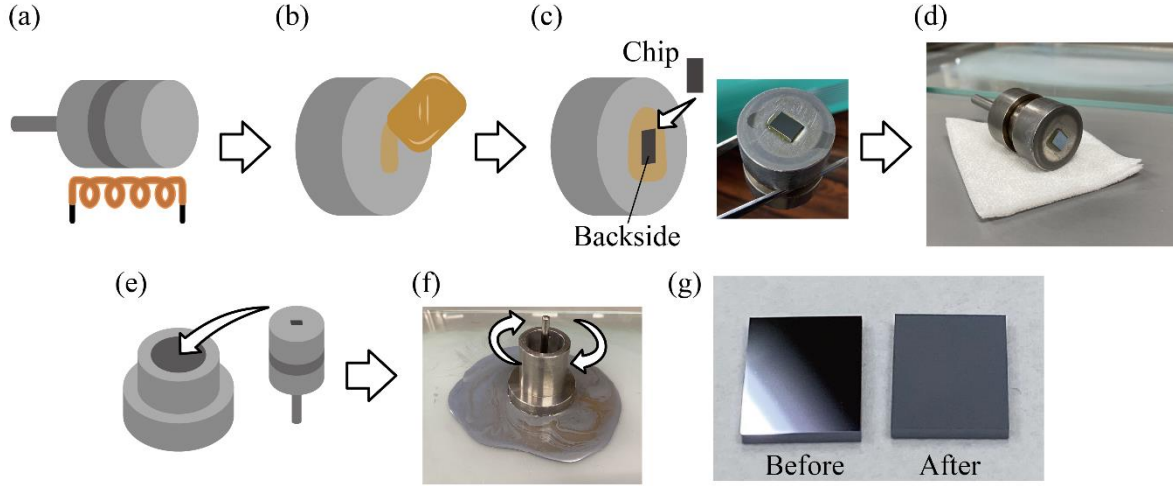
Procedure of polishing the backside of the chip. (a) Heating the tool for melting the wax. (b) Melting the wax. (c) Attaching the front of the chip to the wax. (d) Cooling the tool. (e) Assembling the tools. (f) Dissolving abrasive powder in water and polish. (g) Comparison of backsides of the chips before and after polishing.
